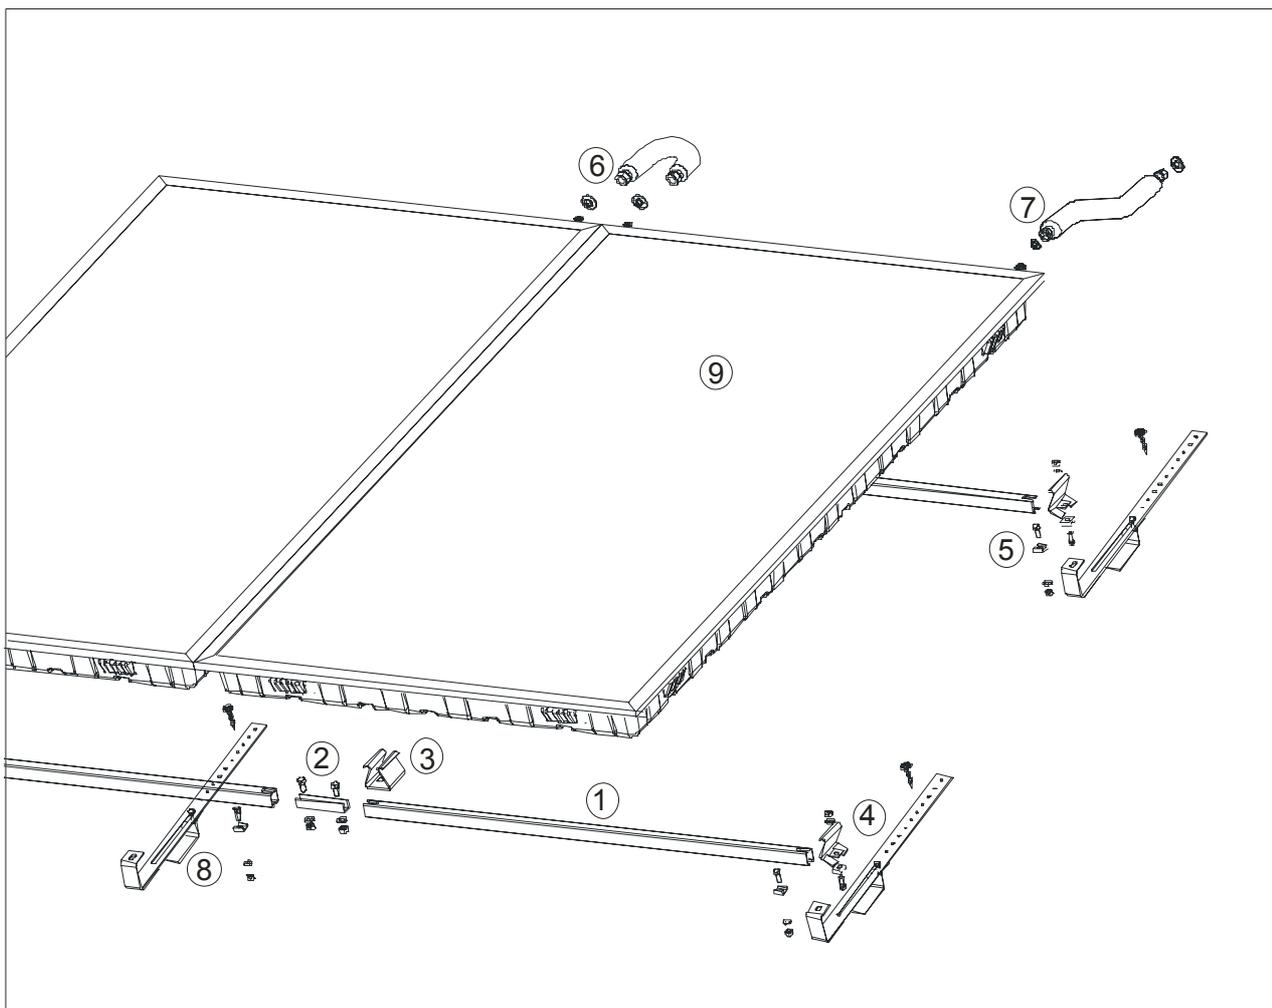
Exploded View Of Vertical On-Roof Collector Arrangement
